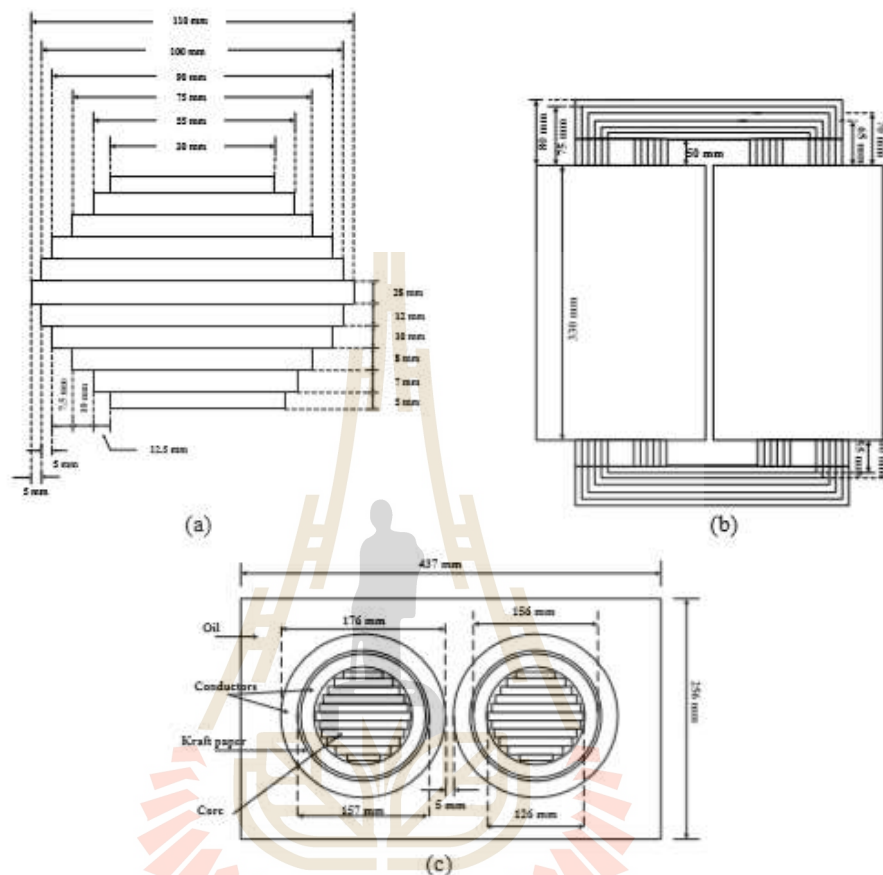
Dimension of autotransformer (a) core of transformer (b) right view (c) top view
